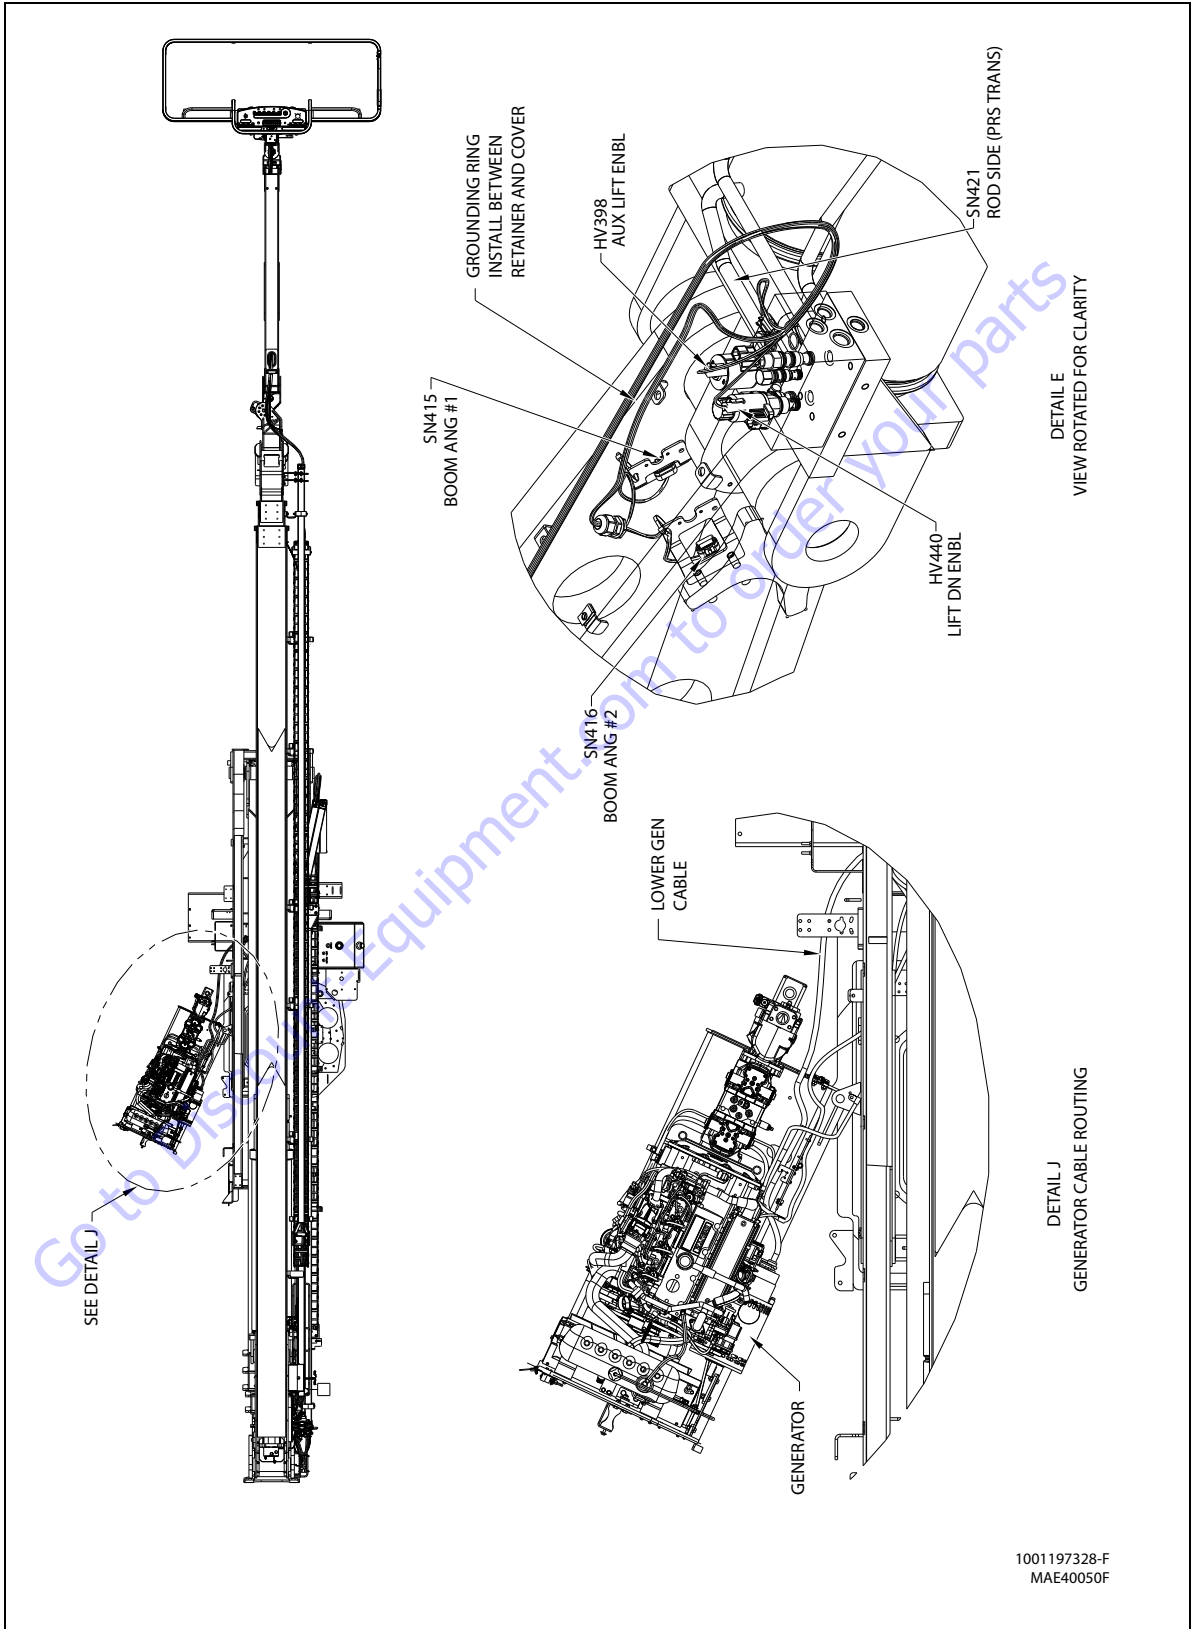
Boom Electrical Installation (SkyPower) - Sheet 4 of 6
